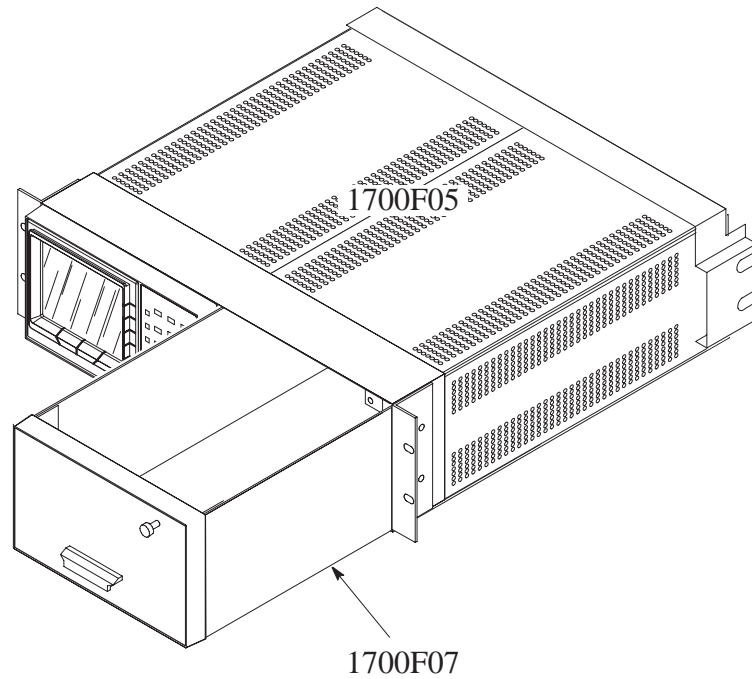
A 1700F05 rack mounting cabinet with a 1700F07 utility drawer.
